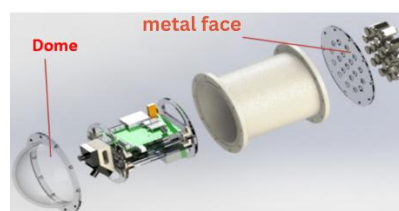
ROV's Exploded view of the electrical enclosure designed by Mohaned Rafea using SolidWorks
